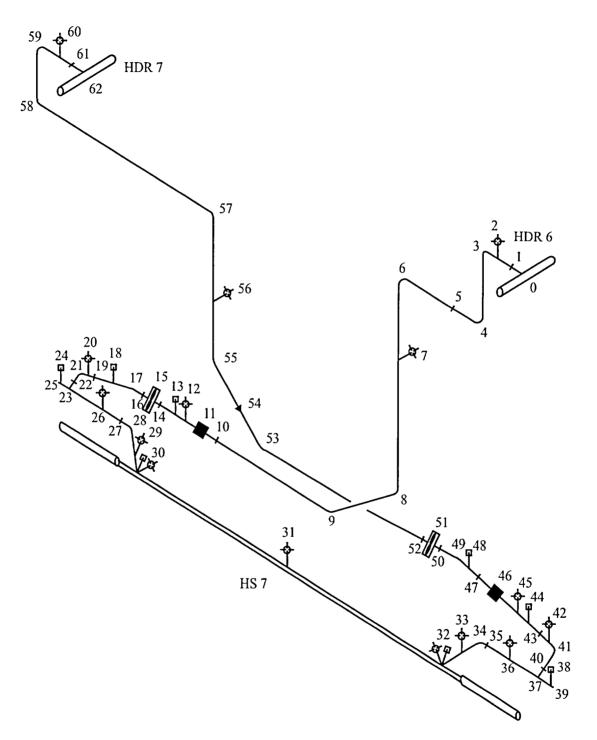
Elevation Diagram for Heated Section HS7 Feeders
